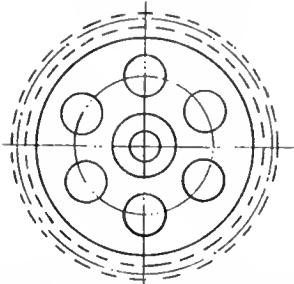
DISC WHEEL WITH HOLES TO RELIEVE STRAINS DUE TO COOLING AFTER CASTING.
